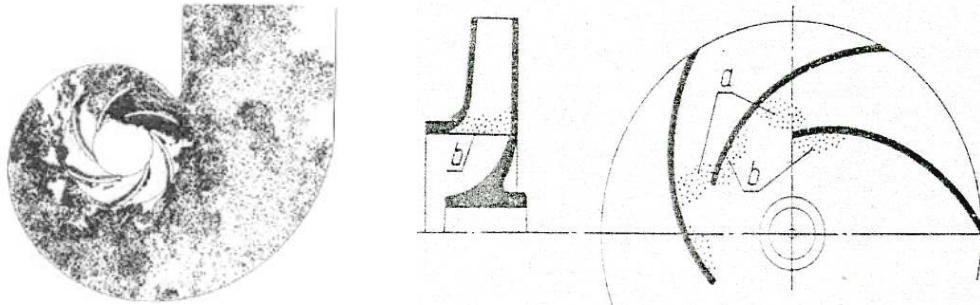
Absorbed air in the impeller of the pump and pitting due to cavitation in a pump impeller
